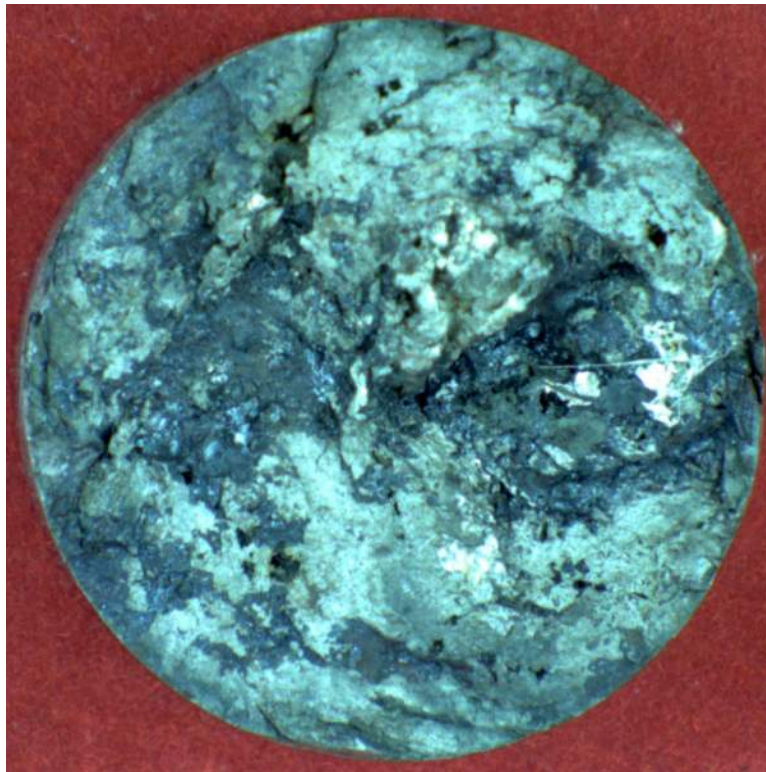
Photo. Rod 2 fracture surface after cleaning.
